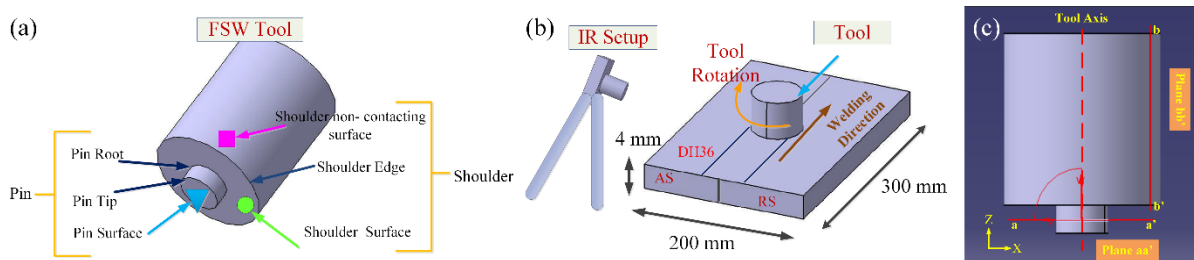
Schematic representation: (a) tool designation, (b) monitoring of FSW process using non-contact IR camera, and (c) pin tip and shoulder cross-section for post-weld inspection (Schematic is drawn not to scale)
